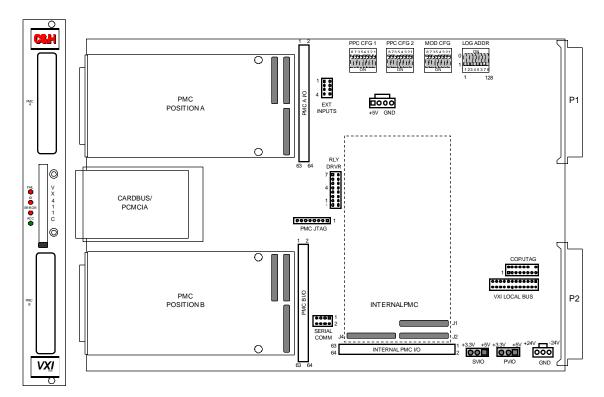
Front Panel and Top View (Top Shield Not Shown)
